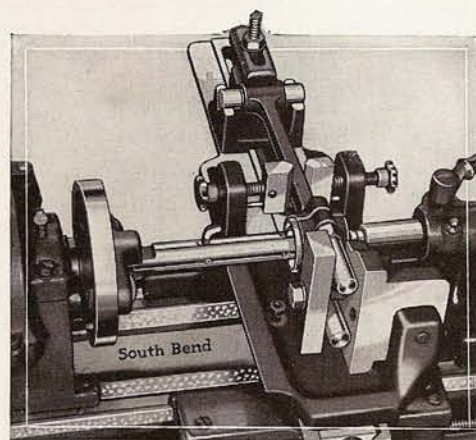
A Connecting Rod Clamped in Position for Boring and Facing.
